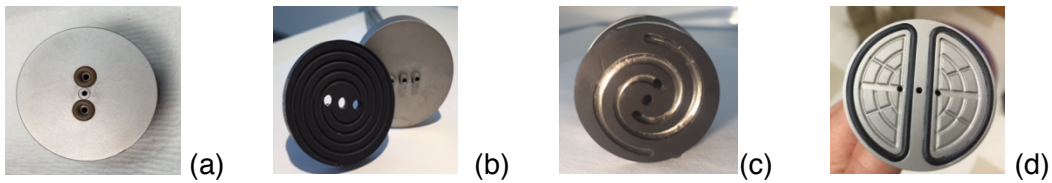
Examples of new elastomer based inlet end-piece designs, (a) O-ring, (b) Elastomer spiral, (c), Spiral with gasket, and (d) Half-moons
